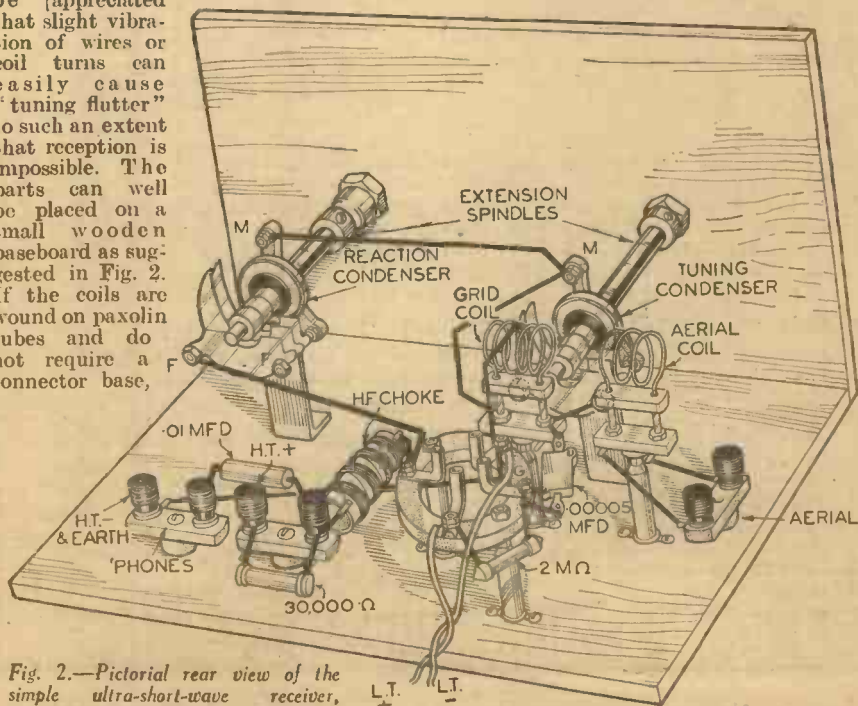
Pictorial rear view of the simple ultra-short-wave receiver, showing layout of components.
